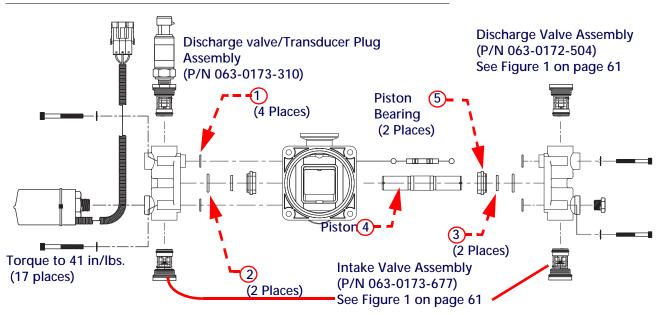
Pump Head Parts and Seal Installation (P/N 016-0171-612)
